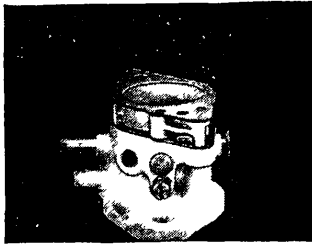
Install insulator and gaskets. Be sure holes in casting, insulator and gaskets line up properly
